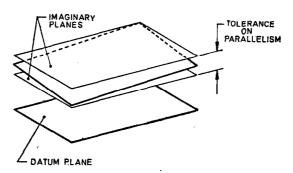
EXAGGERATED ILLUSTRATION OF PARALLELISM TOLERANCE
